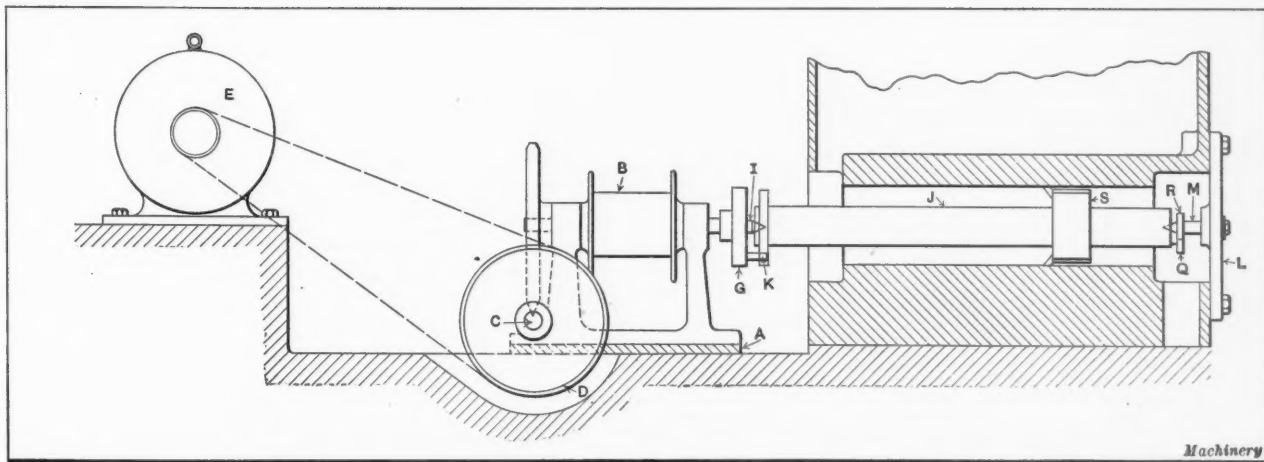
Arrangement for boring Steam Engine Condenser without removing Engine from its Foundation
